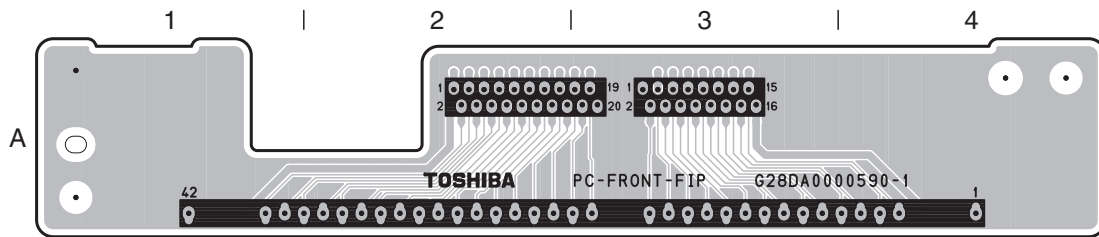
Front FIP PC Board (Bottom side)
